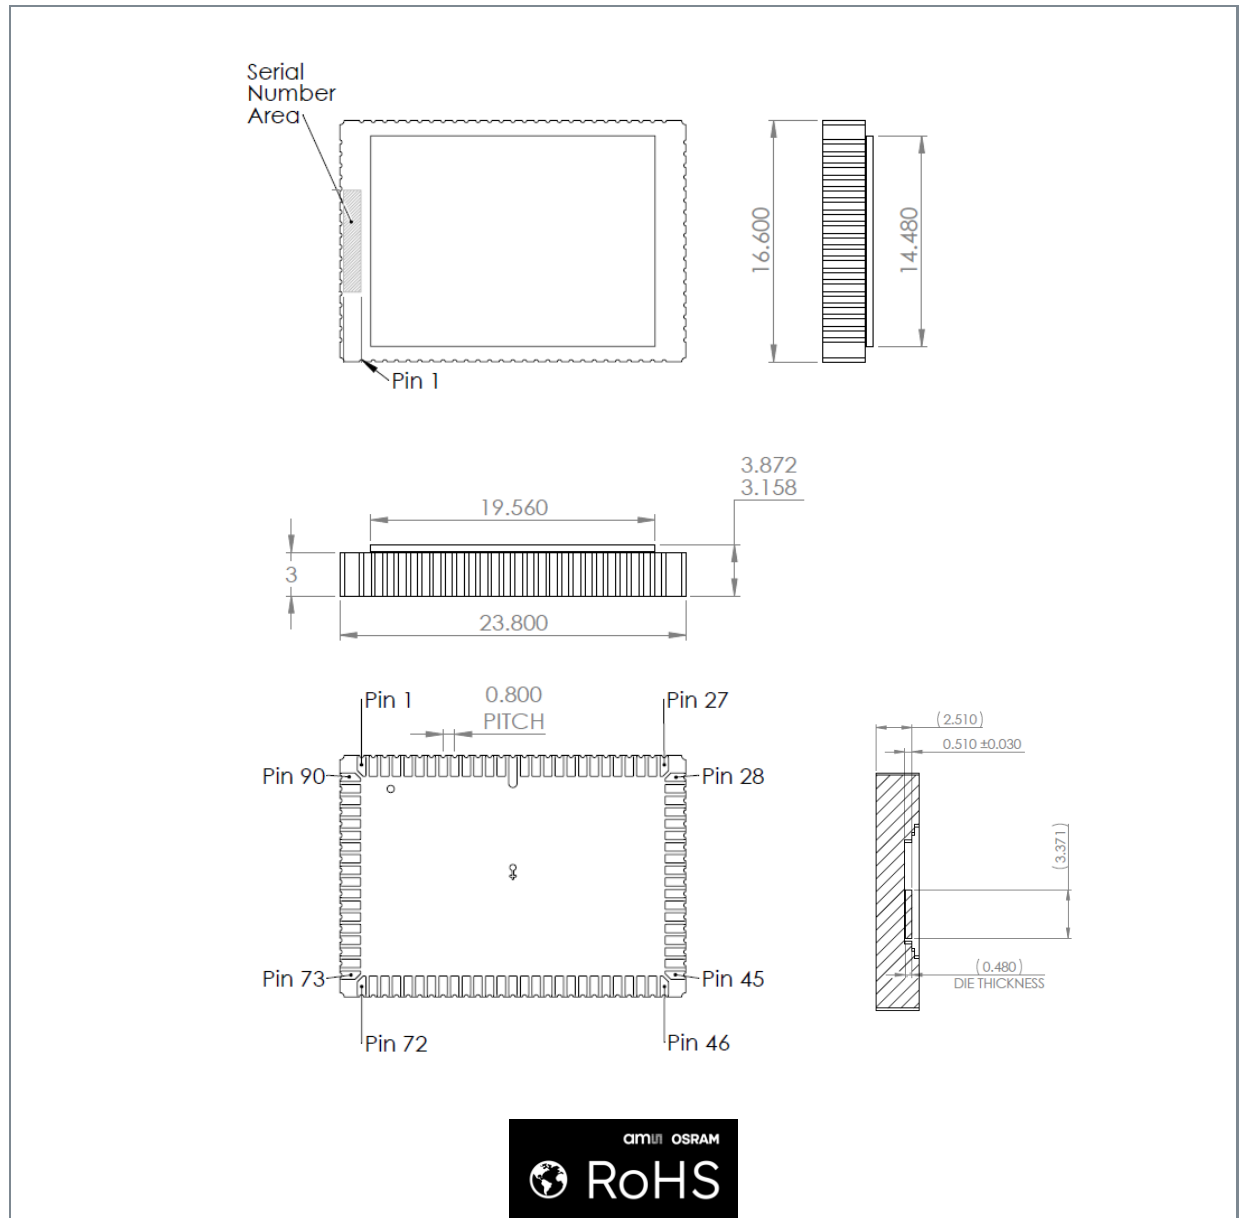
DR2K7 / DR2x2K7 / DR4K3.5 Invar package outline drawing
